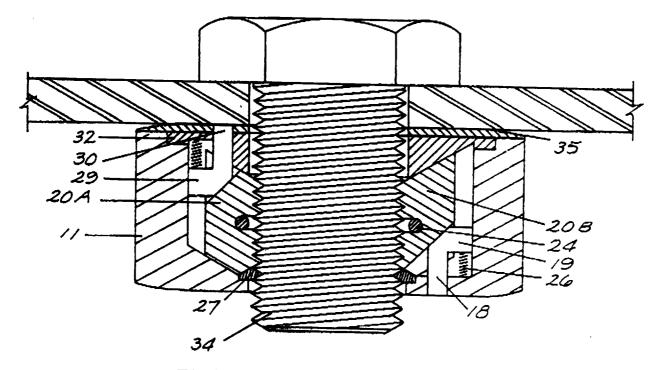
is a sectional view, in longitudinal central section with a bolt or threaded shaft or a spindle inserted from another side of the nut.
